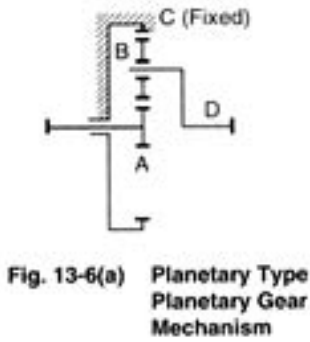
(a) Planetary Type Planetary Gear Mechanism
